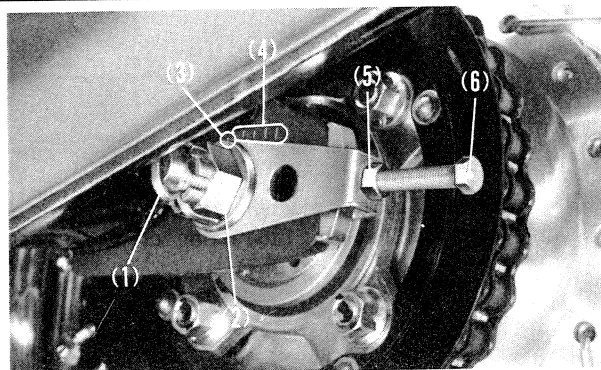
(1) Cotter pin (2) Rear axle nut (3) Index mark (4) Corresponding scale (5) Lock nut (6) Adjusting bolt
